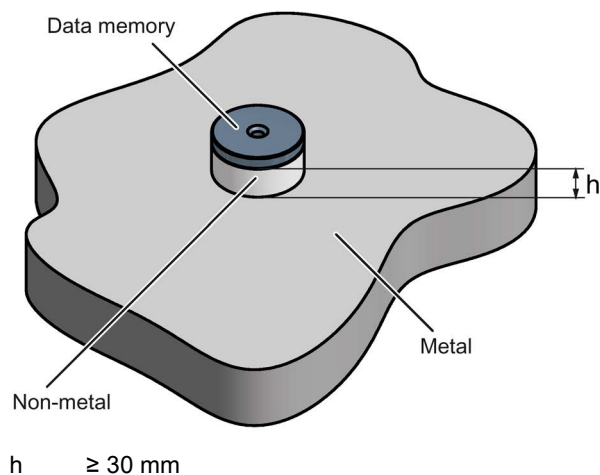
Mounting the MDS D139/D339 on metal with spacer
